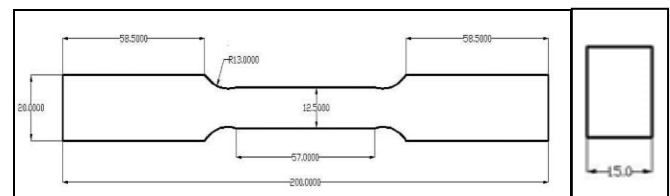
Dimensions of tensile test specimens (all dimensions in mm).
